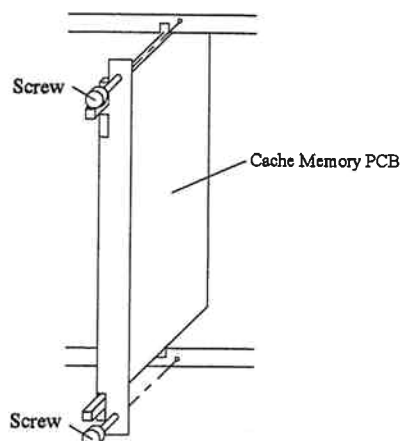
Removal of the Cache Memory PCB
